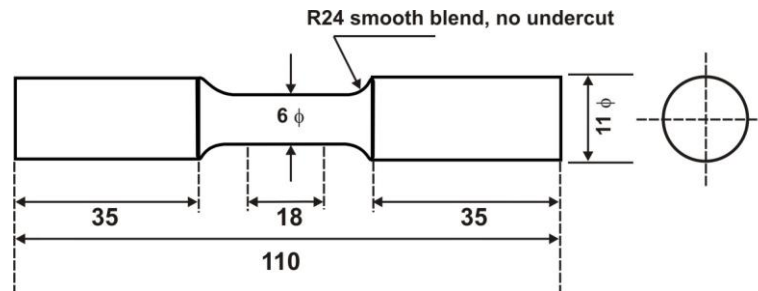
Drawing of LCF specimen (Dimensions are in mm).
